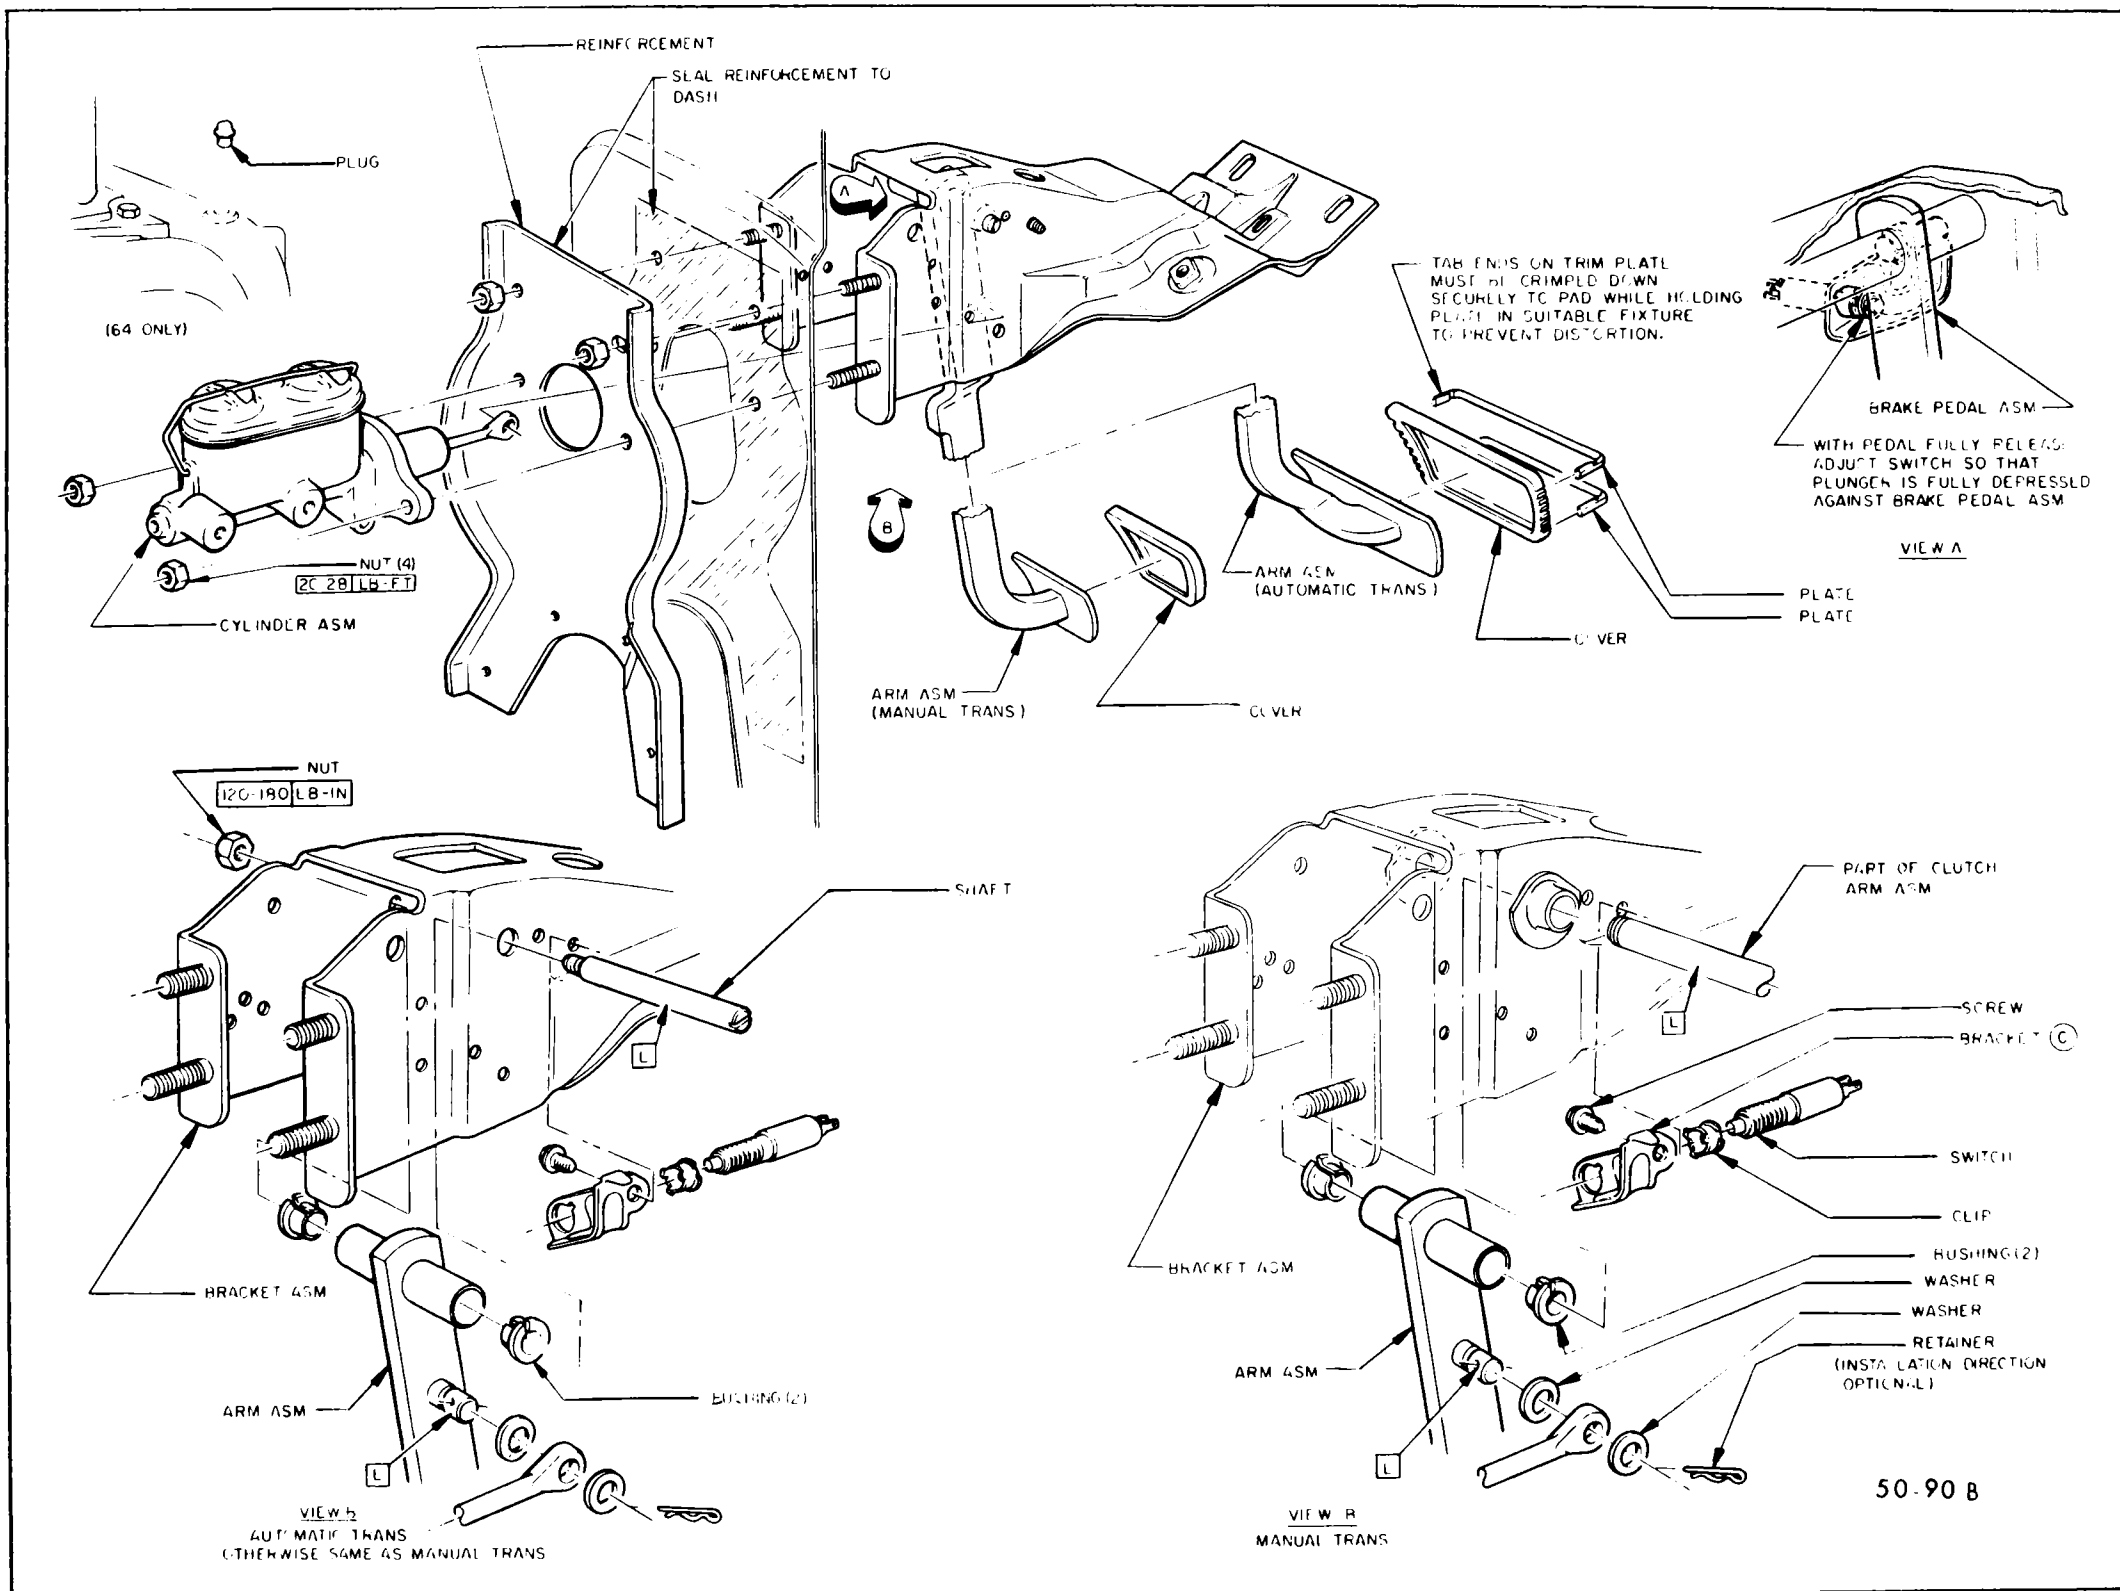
Manual Brake Master Cylinder Mounting
